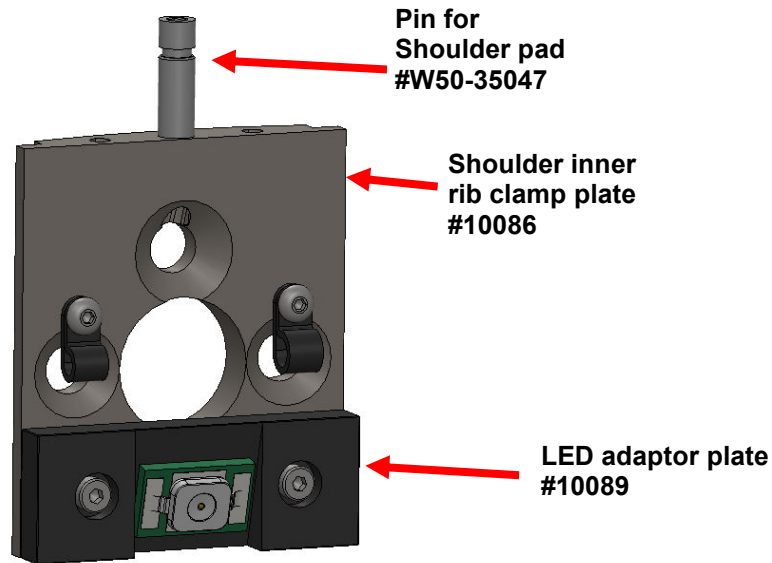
Shoulder center LED adaptor plate, inner rib clamp, pin for shoulder pad, and wire clamps
